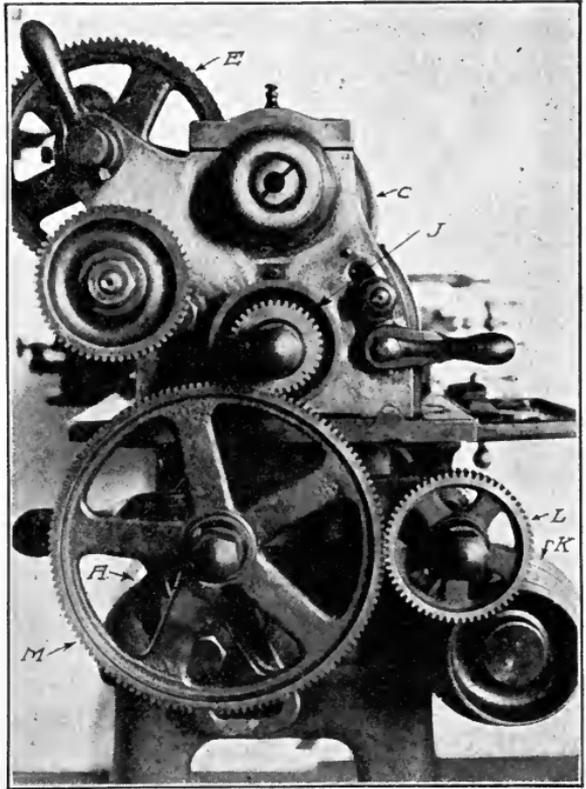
Typical Set-Up of Gears on Lathe Using Back Gear
